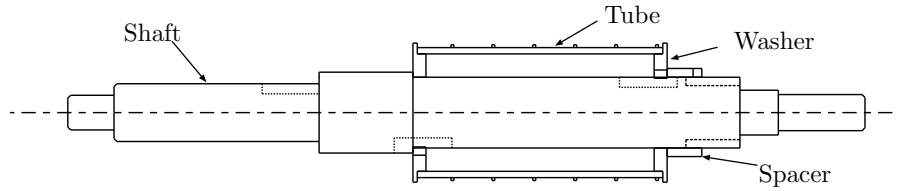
The cross section of the assembled rotor without magnets, seen from the side. The nut fastening the tube and the washers is not included.
